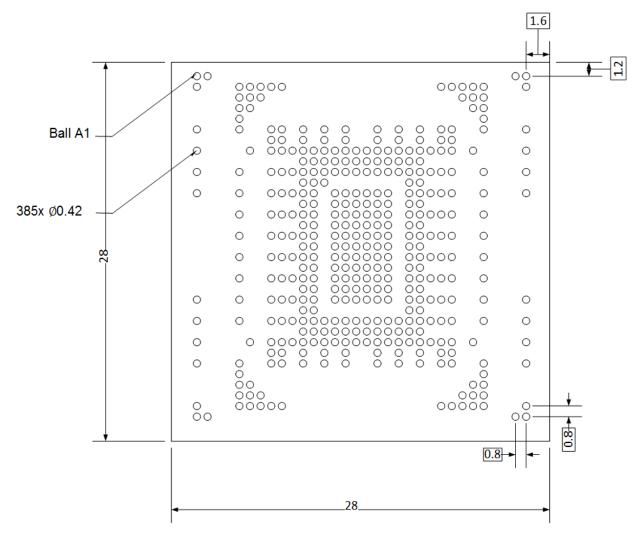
Recommended Land Pattern for M.2 Type 2828 BGA (Top View)
